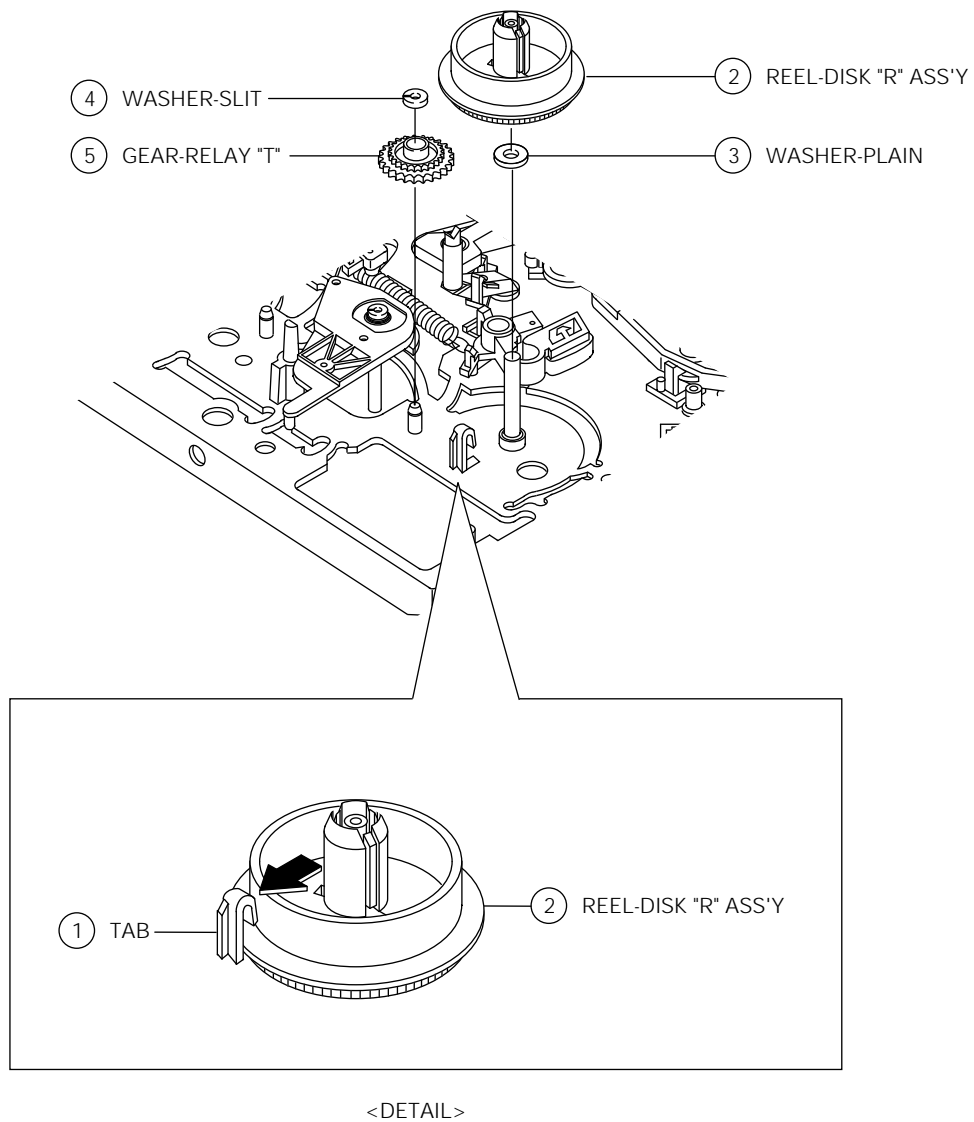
Reel Disk "R" Ass'y and Gear Relay "T" Removal
